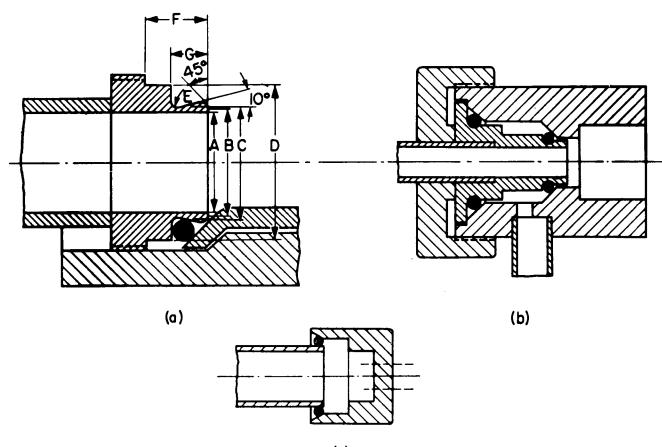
Special conical O-ring seals: (a) modified from refrigeration type fitting (after Hodder⁵⁷⁰); (b) double conical O-ring seal (after Schriever¹¹⁰⁸); (c) rolling O-ring seal. After Edwards³²⁴ (*Courtesy of The Institute of Physics, London, and of The American Institute of Physics*)
